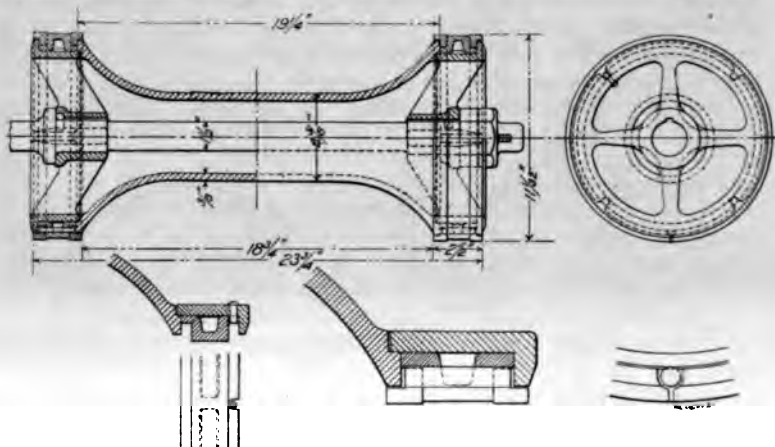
Piston Valve for Express Passenger Locomotive, Atlantic Type
